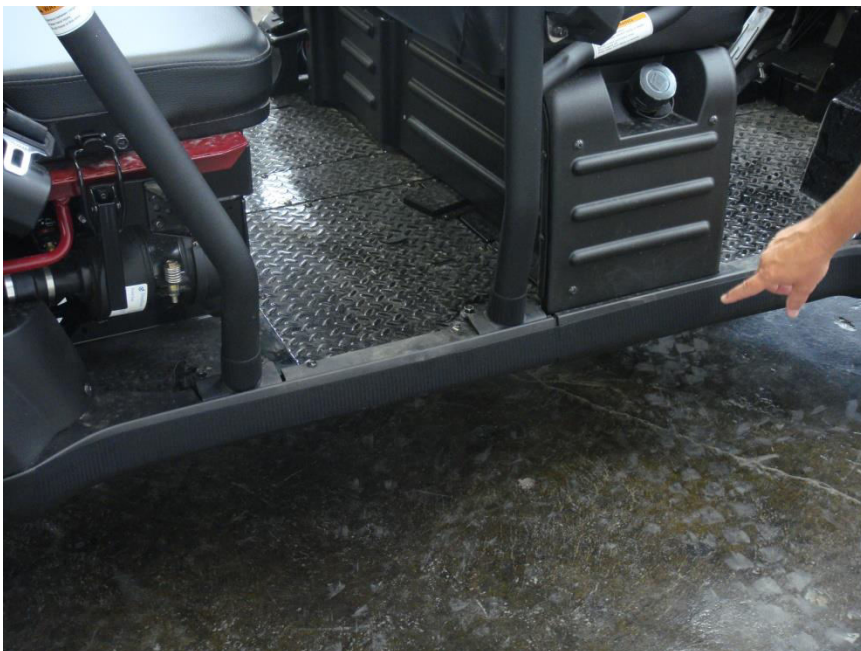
install front Rocker Panel 28" and rear Rocker panel 25" Velcro strips
